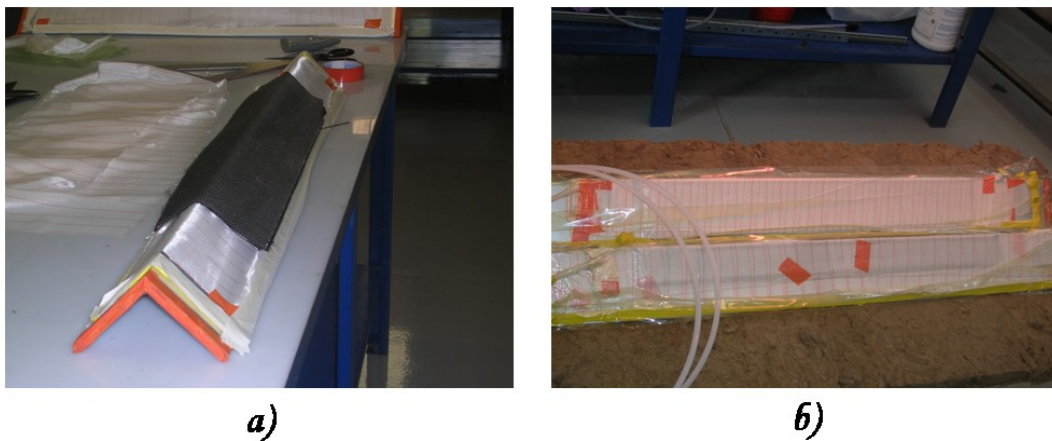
11: Stringers manufacturing. a) Stacking of the preform, b) Vacuum bag
